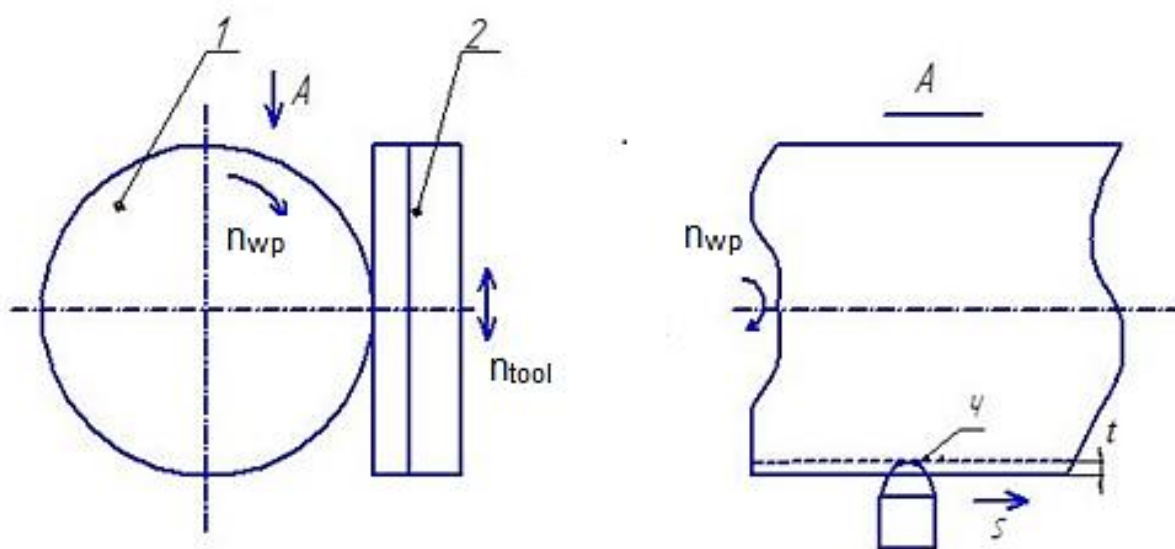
Oscillatory smoothing diagram [5]: 1 – workpiece; 2 – working tool (n_{wp} – workpiece rotation frequency, rpm; n_{tool} – working tool frequency, double stroke per minute)
